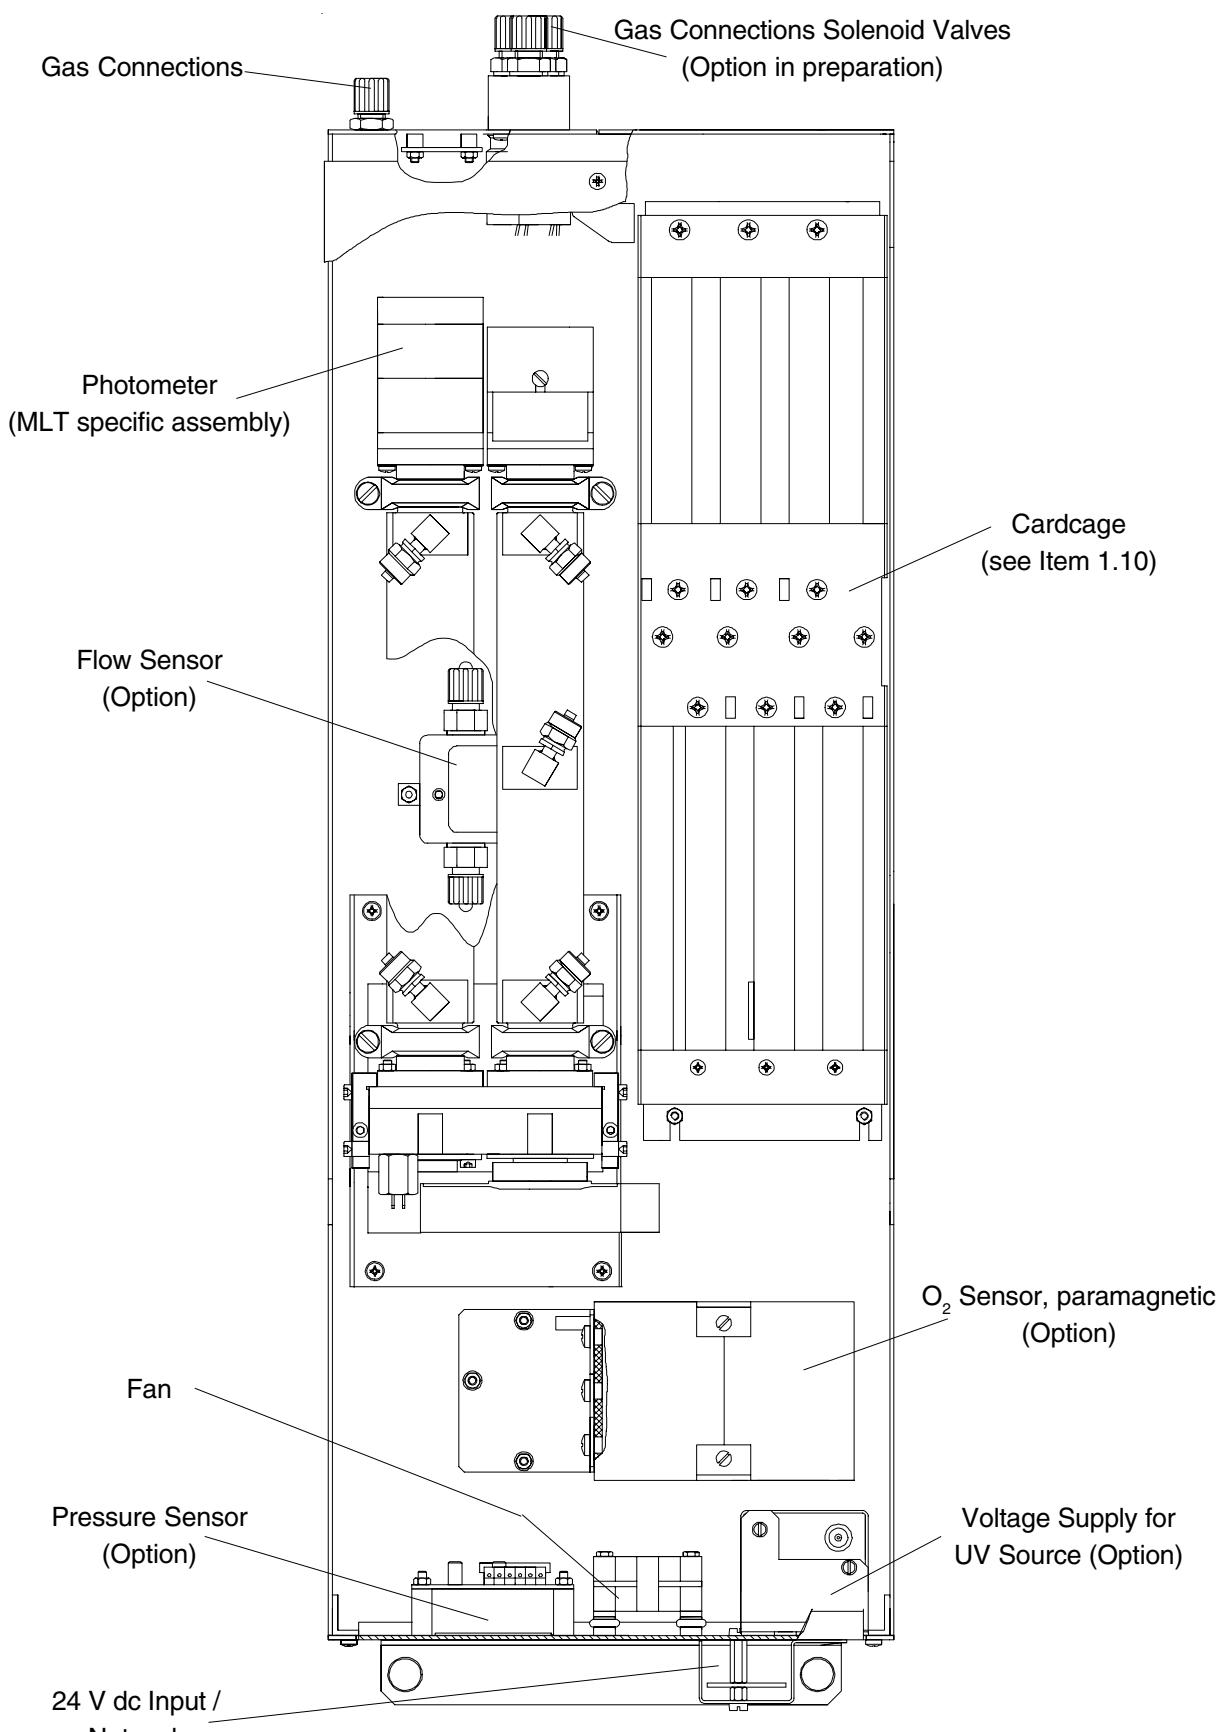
MLT 1, Platform mounting extended, Top view
